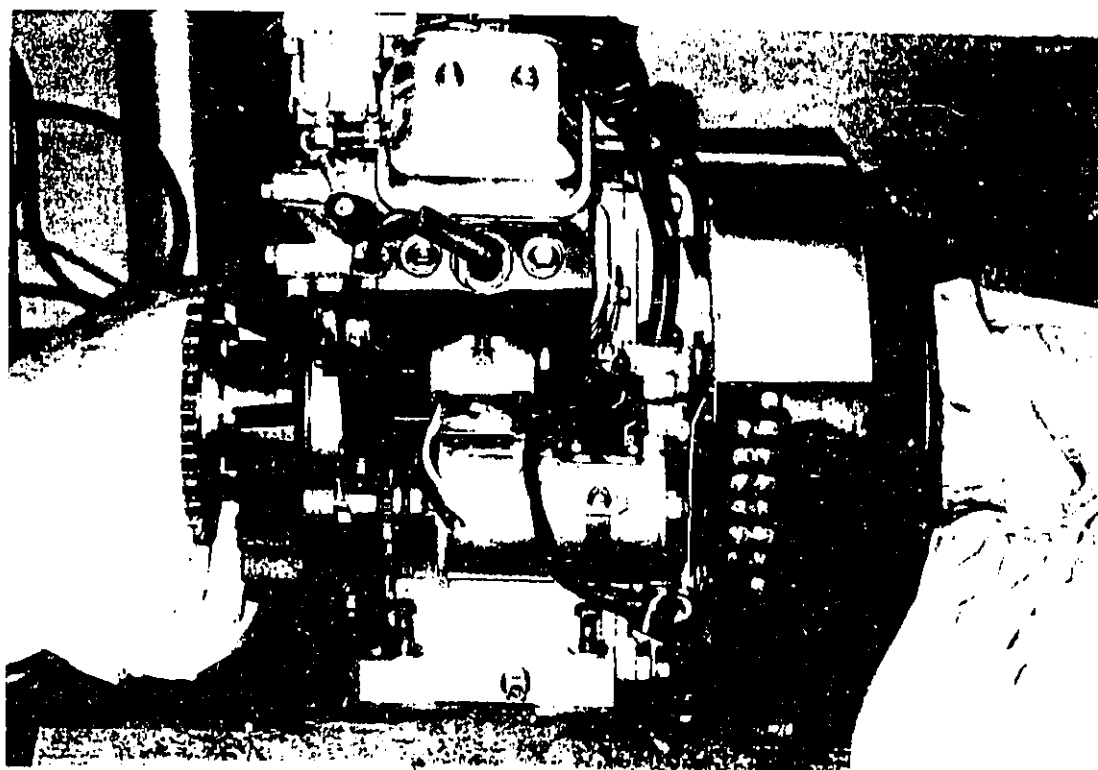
Illustration of the Collar Assembly and Alternator on the B&S Engine
